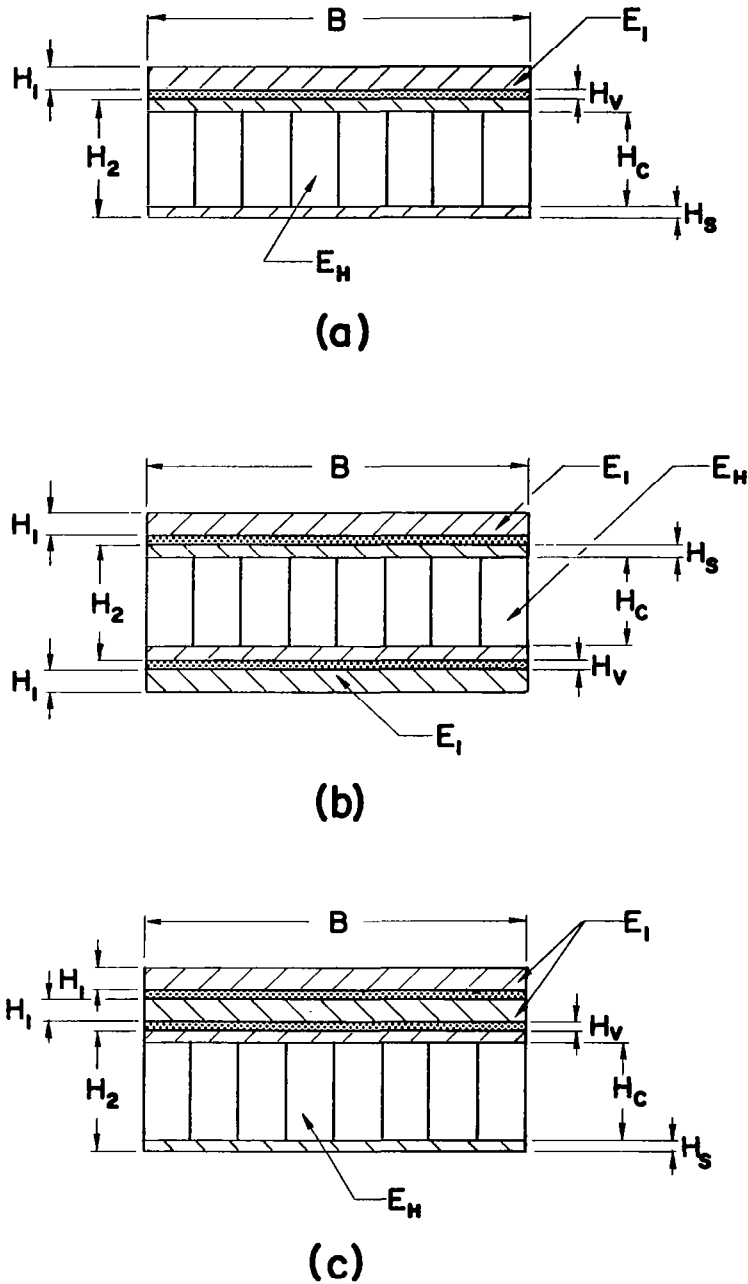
Cross-sections of viscoelastic shear-damped plates consisting of laminated honeycomb and solid structural sheets: (a) single-constrained, (b) double-constrained (symmetrical) and (c) double-constrained (unsymmetrical).
